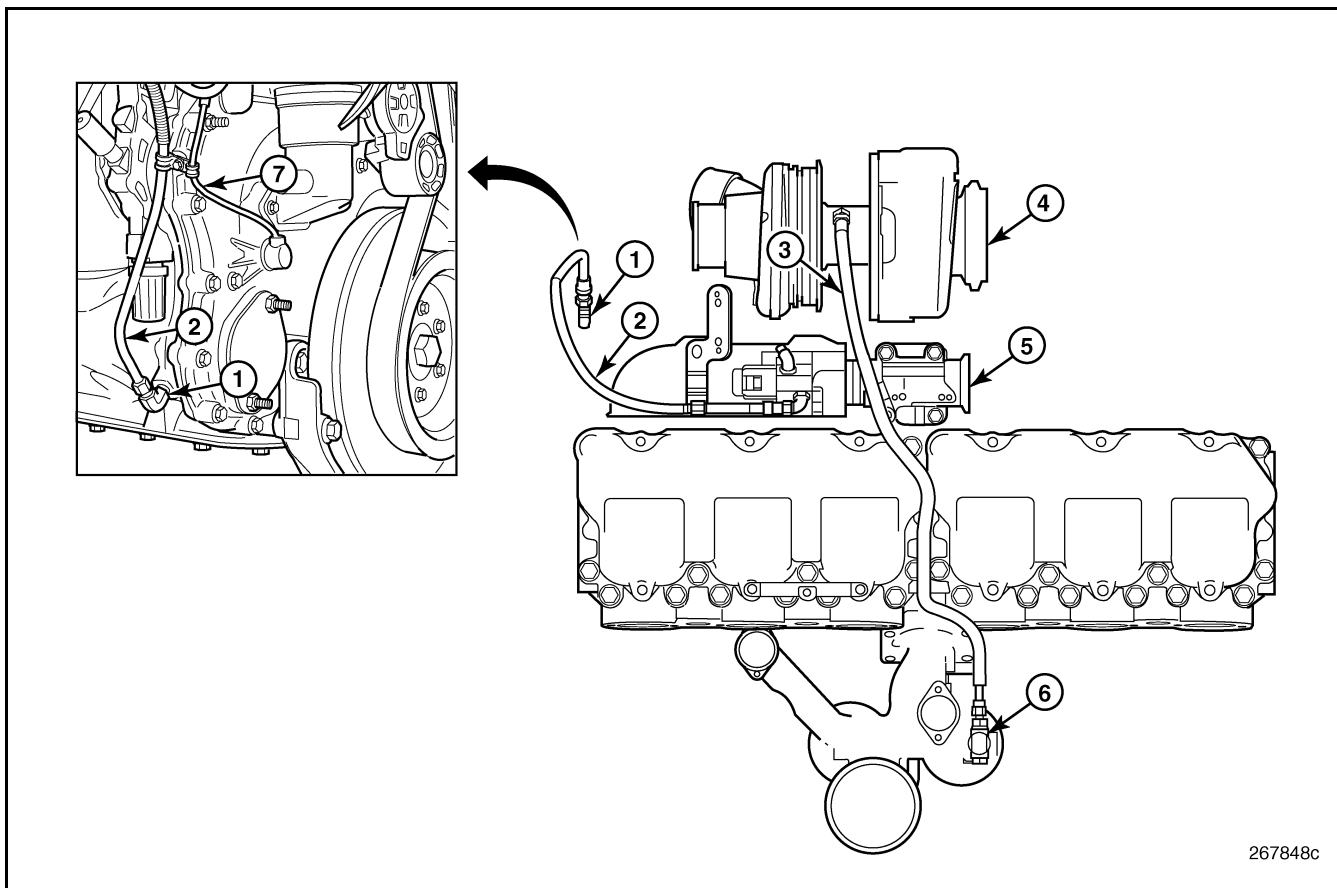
EGR and VTG Oil Supply Lines (AC Engines Built After December 2003)
